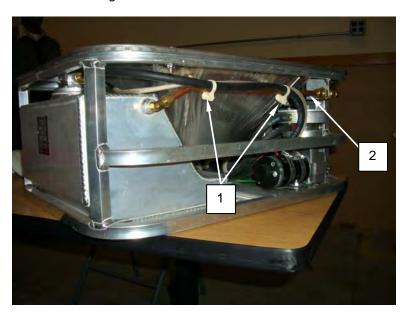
Replace Chassis Mounted Cable Clips and Hose Clamps.
